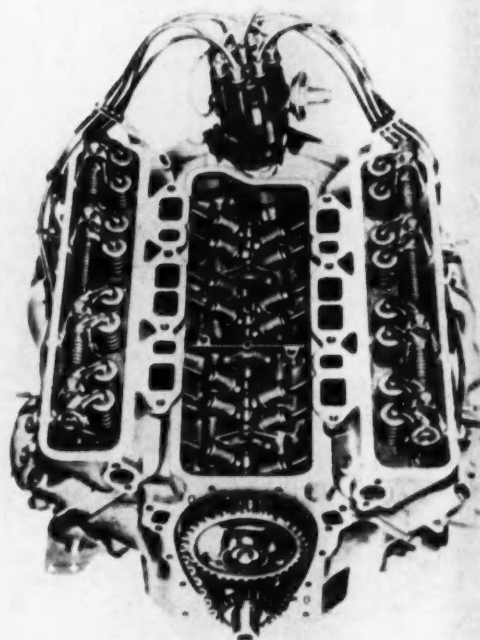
The distributor and oil pump are located on the right side of the camshaft and are driven by a gear at the rear of the camshaft in the orthodox manner
